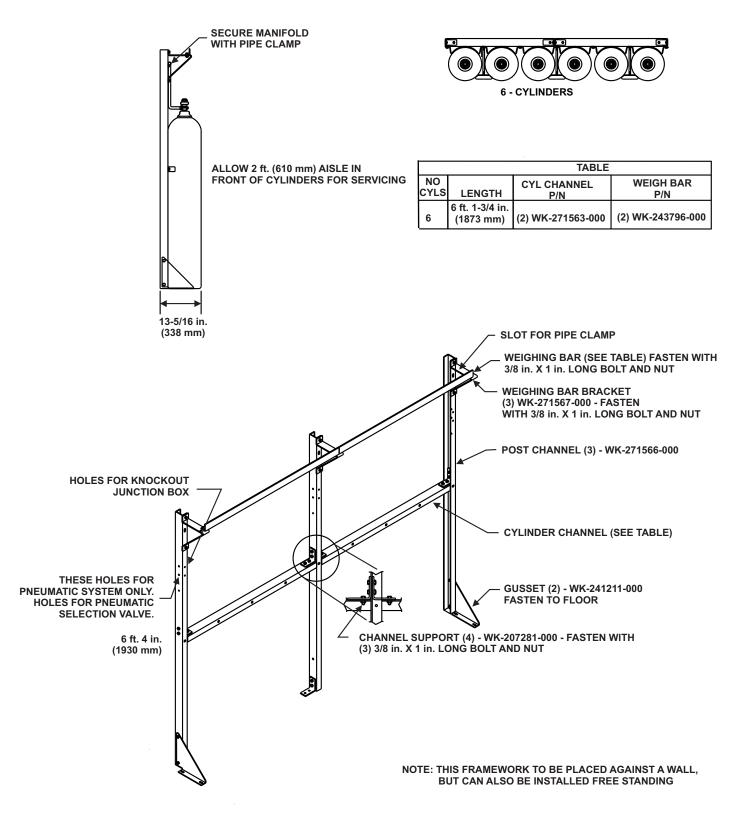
Cylinder Rack and Framing, Example Arrangement
